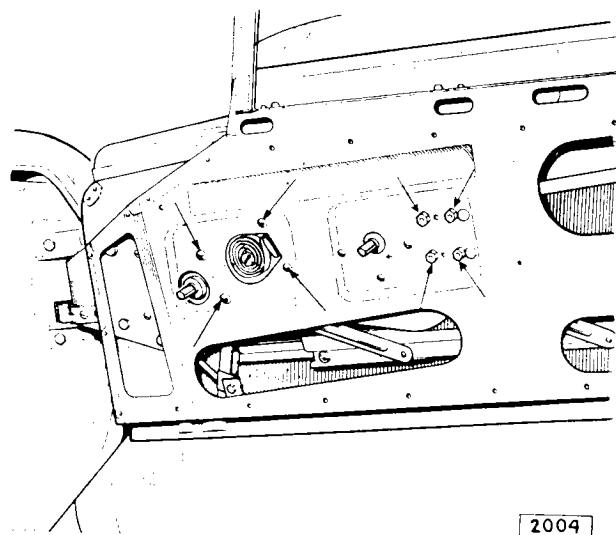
Location of the nuts and screws securing the window regulator to the door panel.
